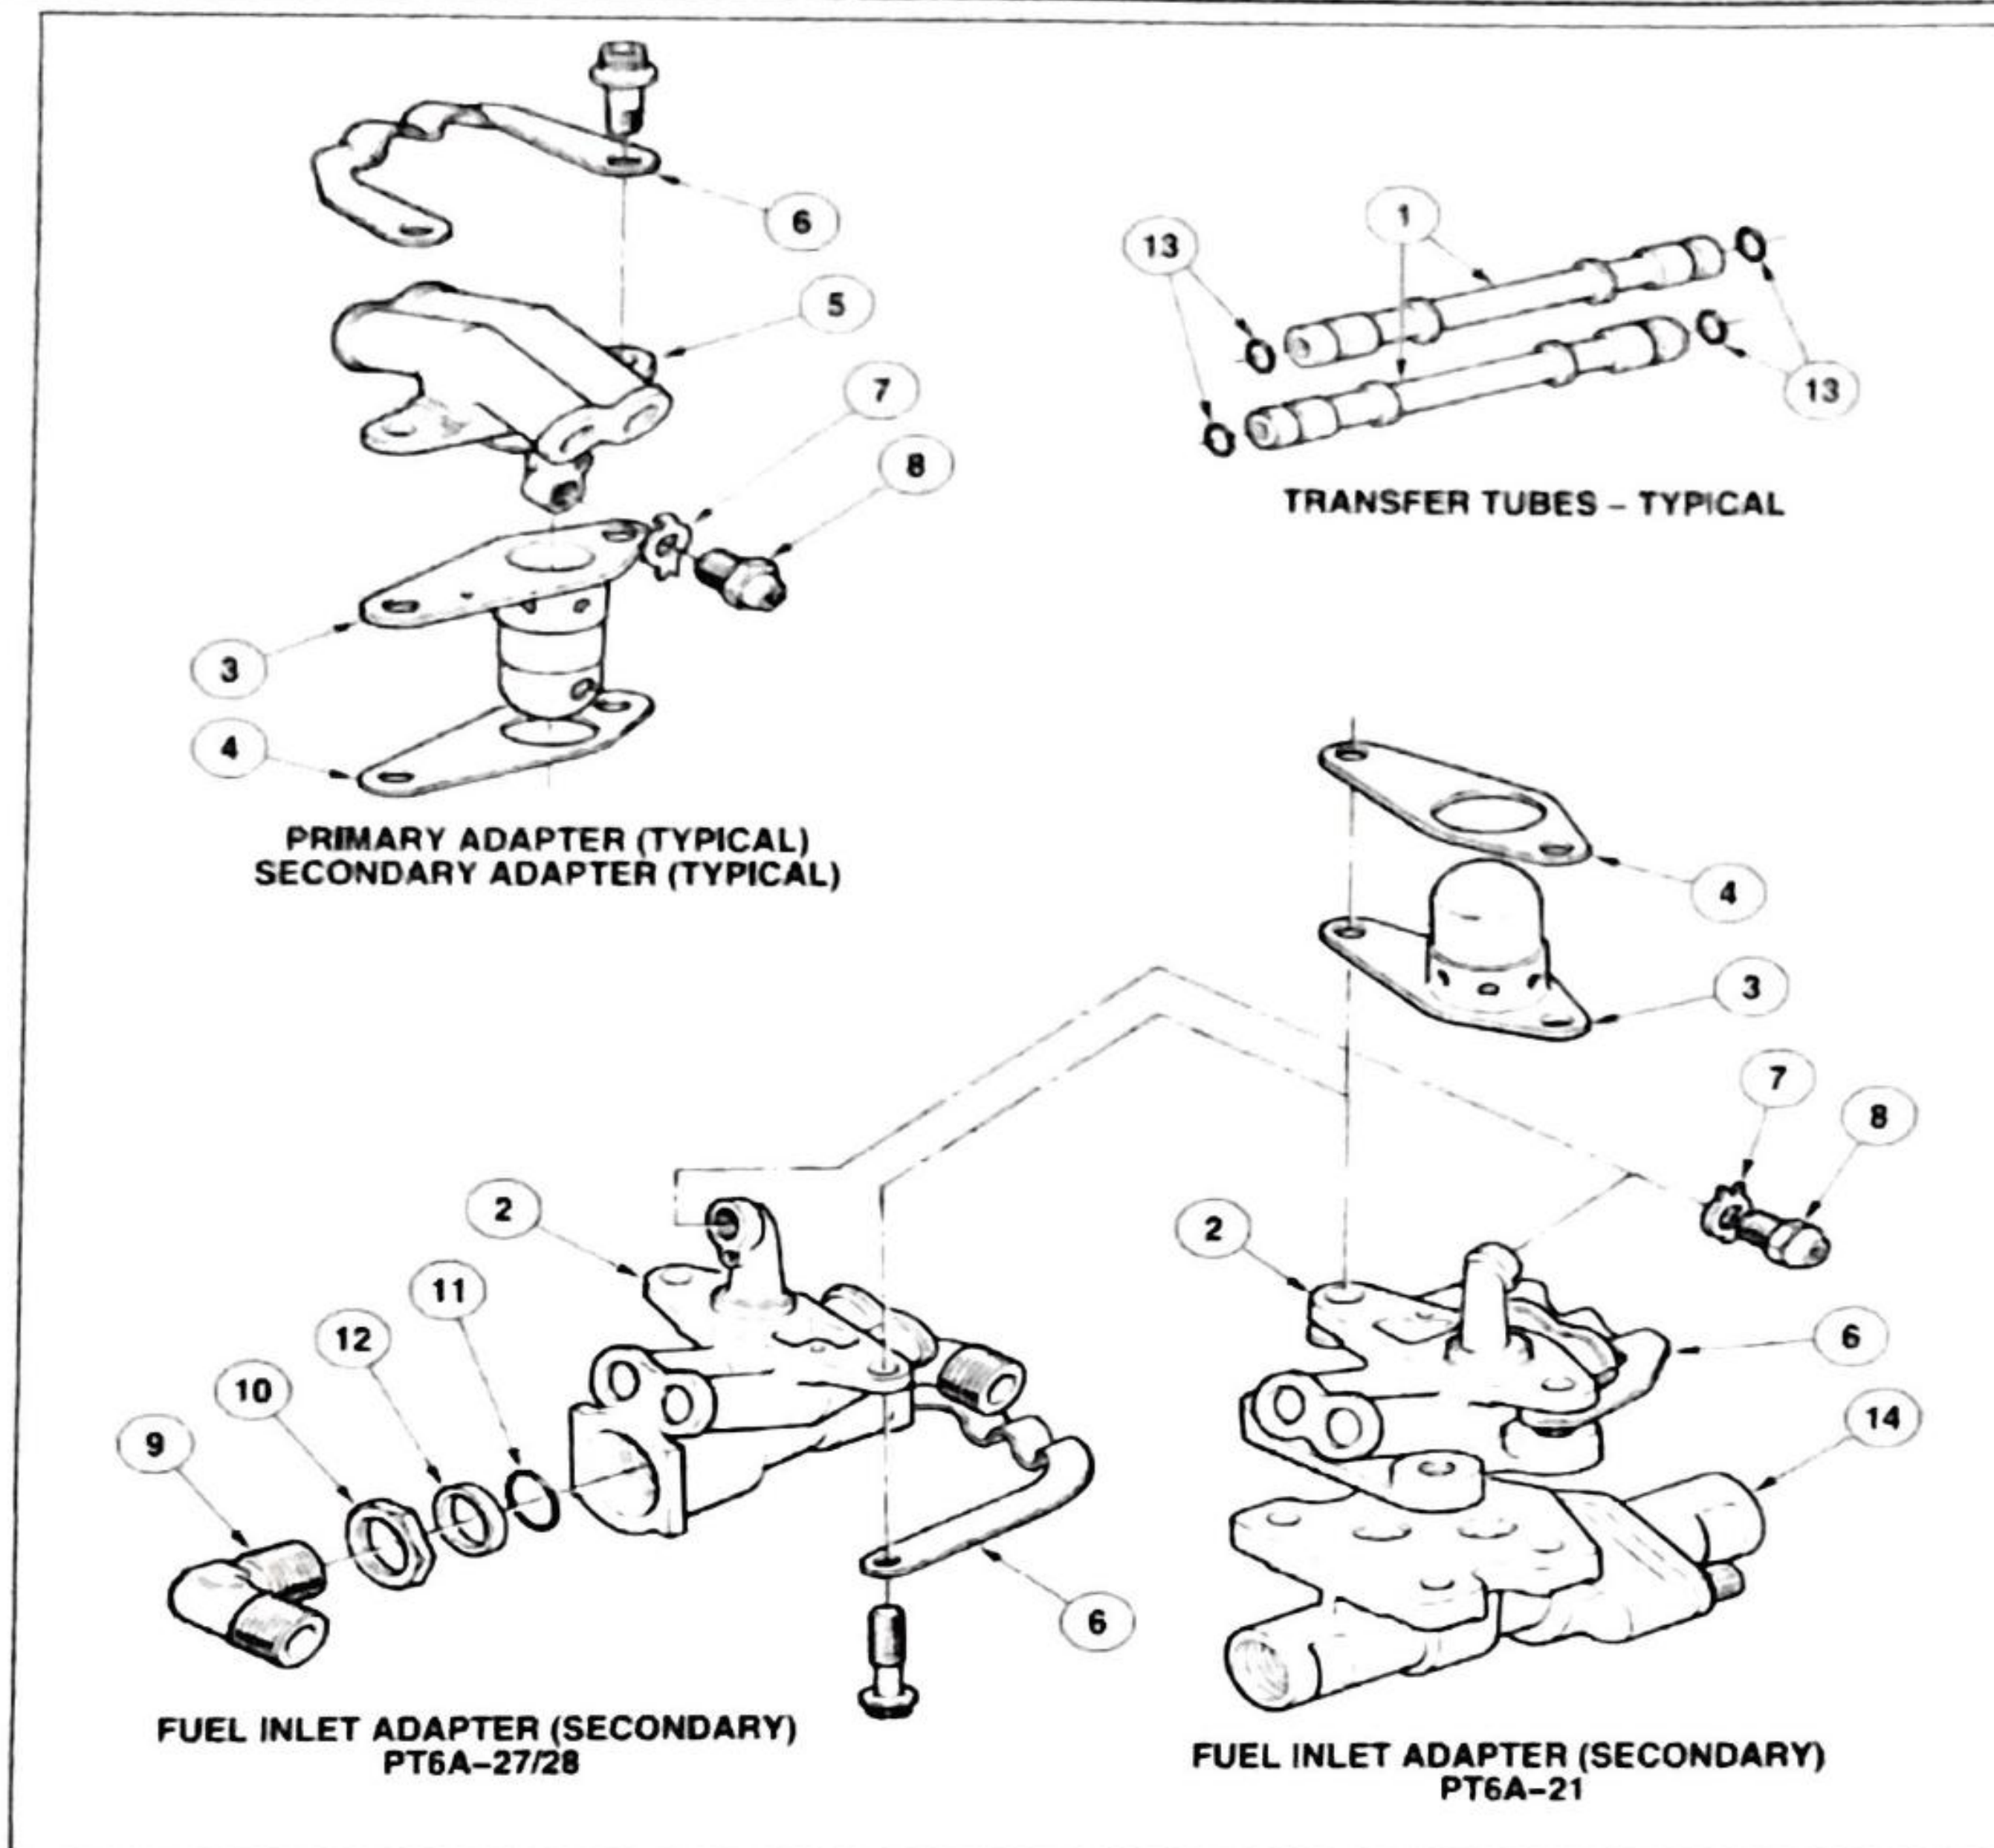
Removal/ Installation of Fuel Manifold Adapter
